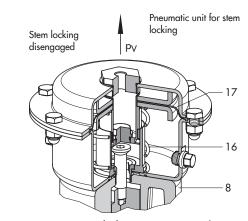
Pneumatic stem locking: Type 2371-10/-11
